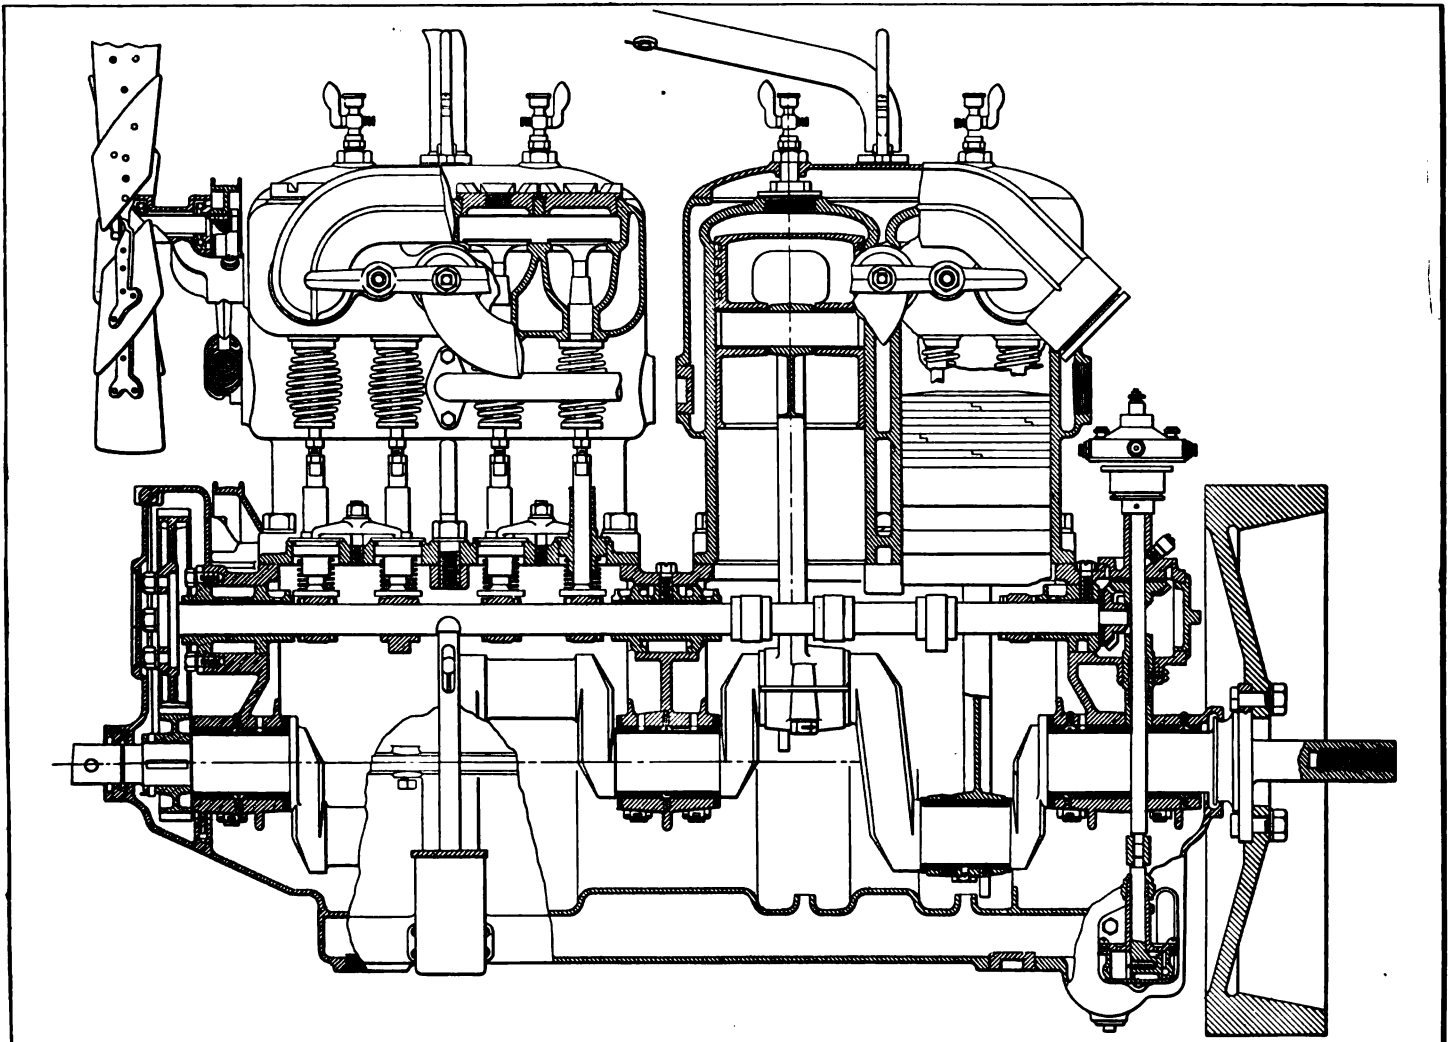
Engine showing in partial section, partial elevation, mechanical details being exactly reproduced from working drawing
